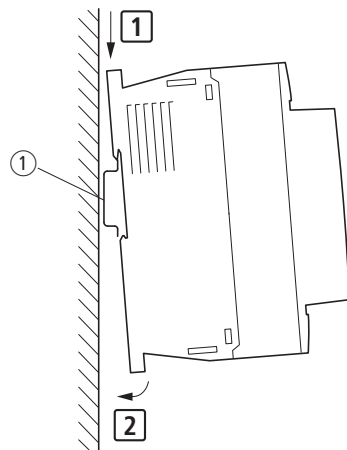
Mounting on the top-hat rail with devices up to 32 A
